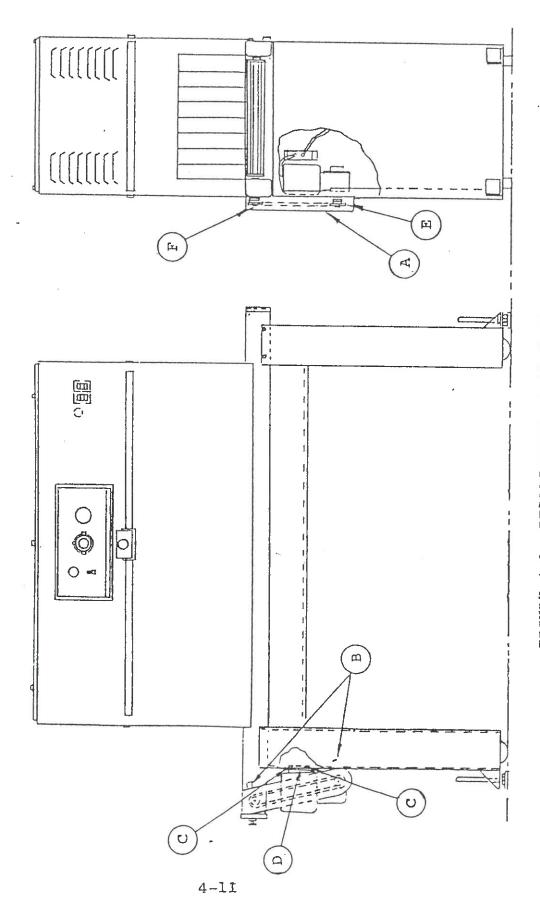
REPLACEMENT OF CONVEYOR DRIVE CHAIN & SPROCKET
